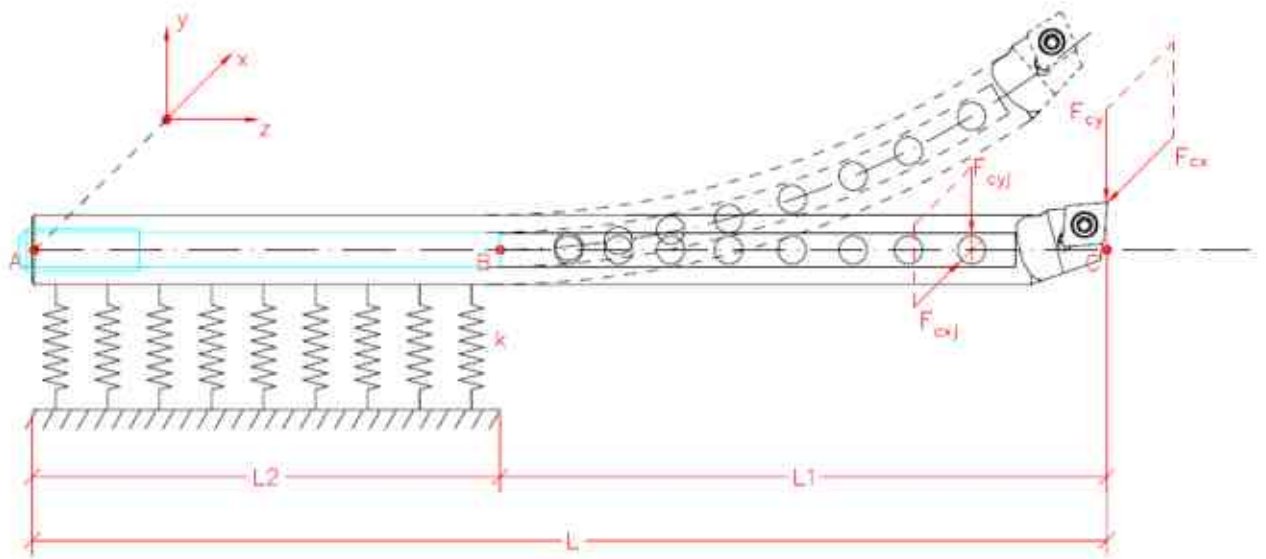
Mechanical model for an impact damper boring bar in Winkler foundation
